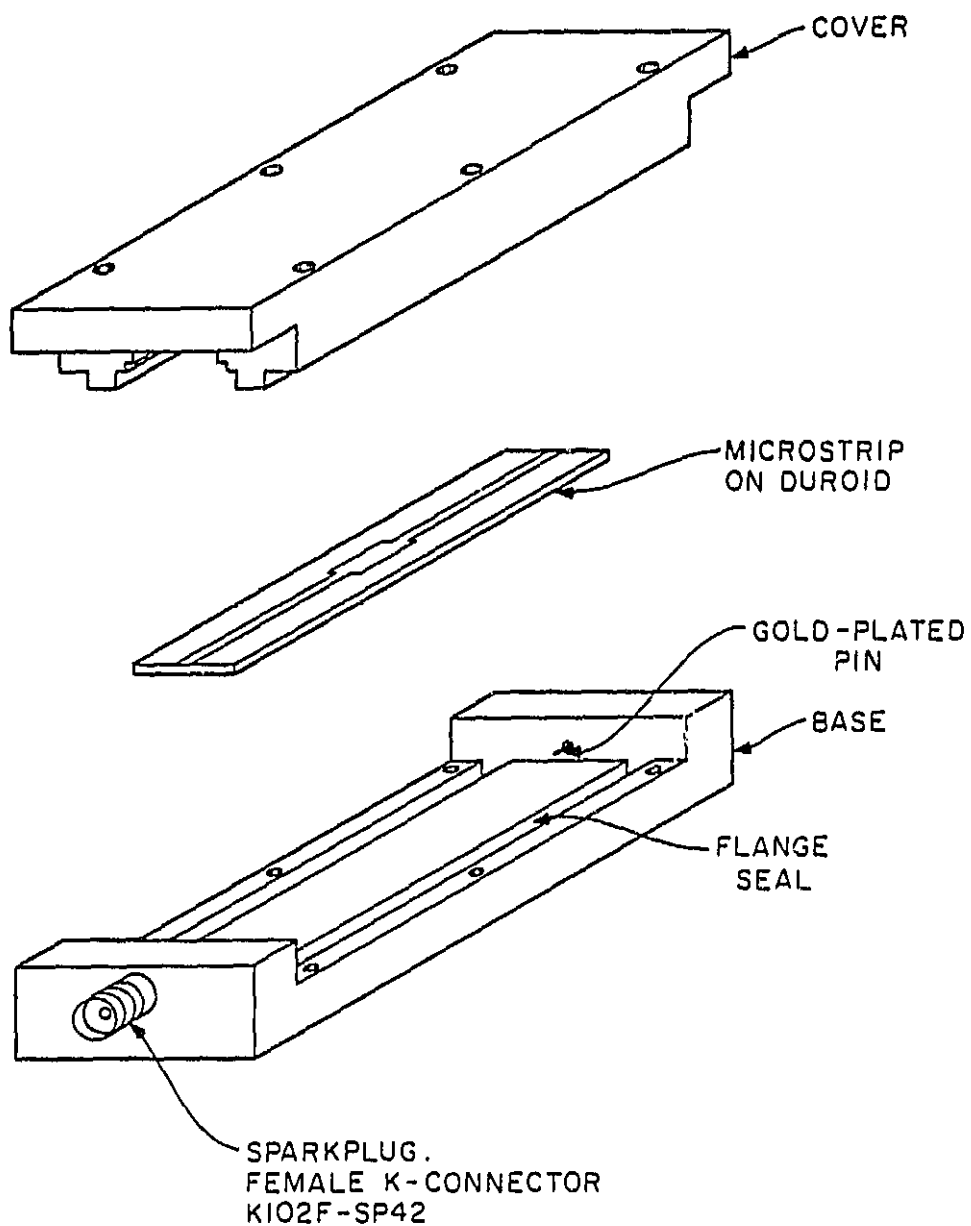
Assembly drawing of test fixture. Note flanged seal to avoid radiation to the outside. Also note that cover presses board tightly onto base.
